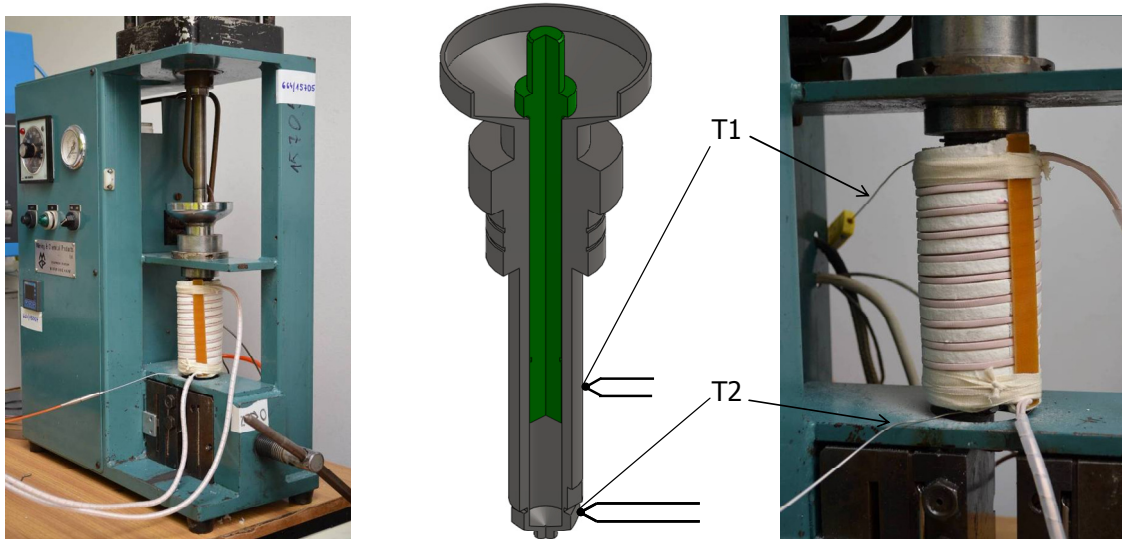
Inductor coil wrapping the steel cylinder of the piston injection machine
